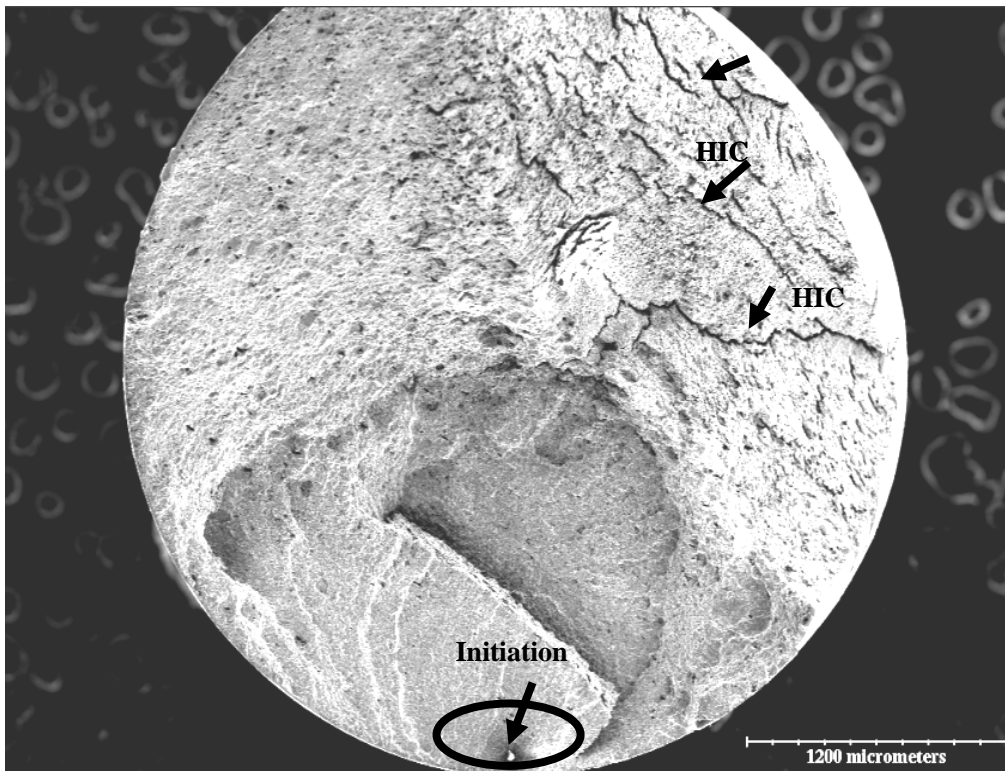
Seamless L80-Mo fracture surface.
